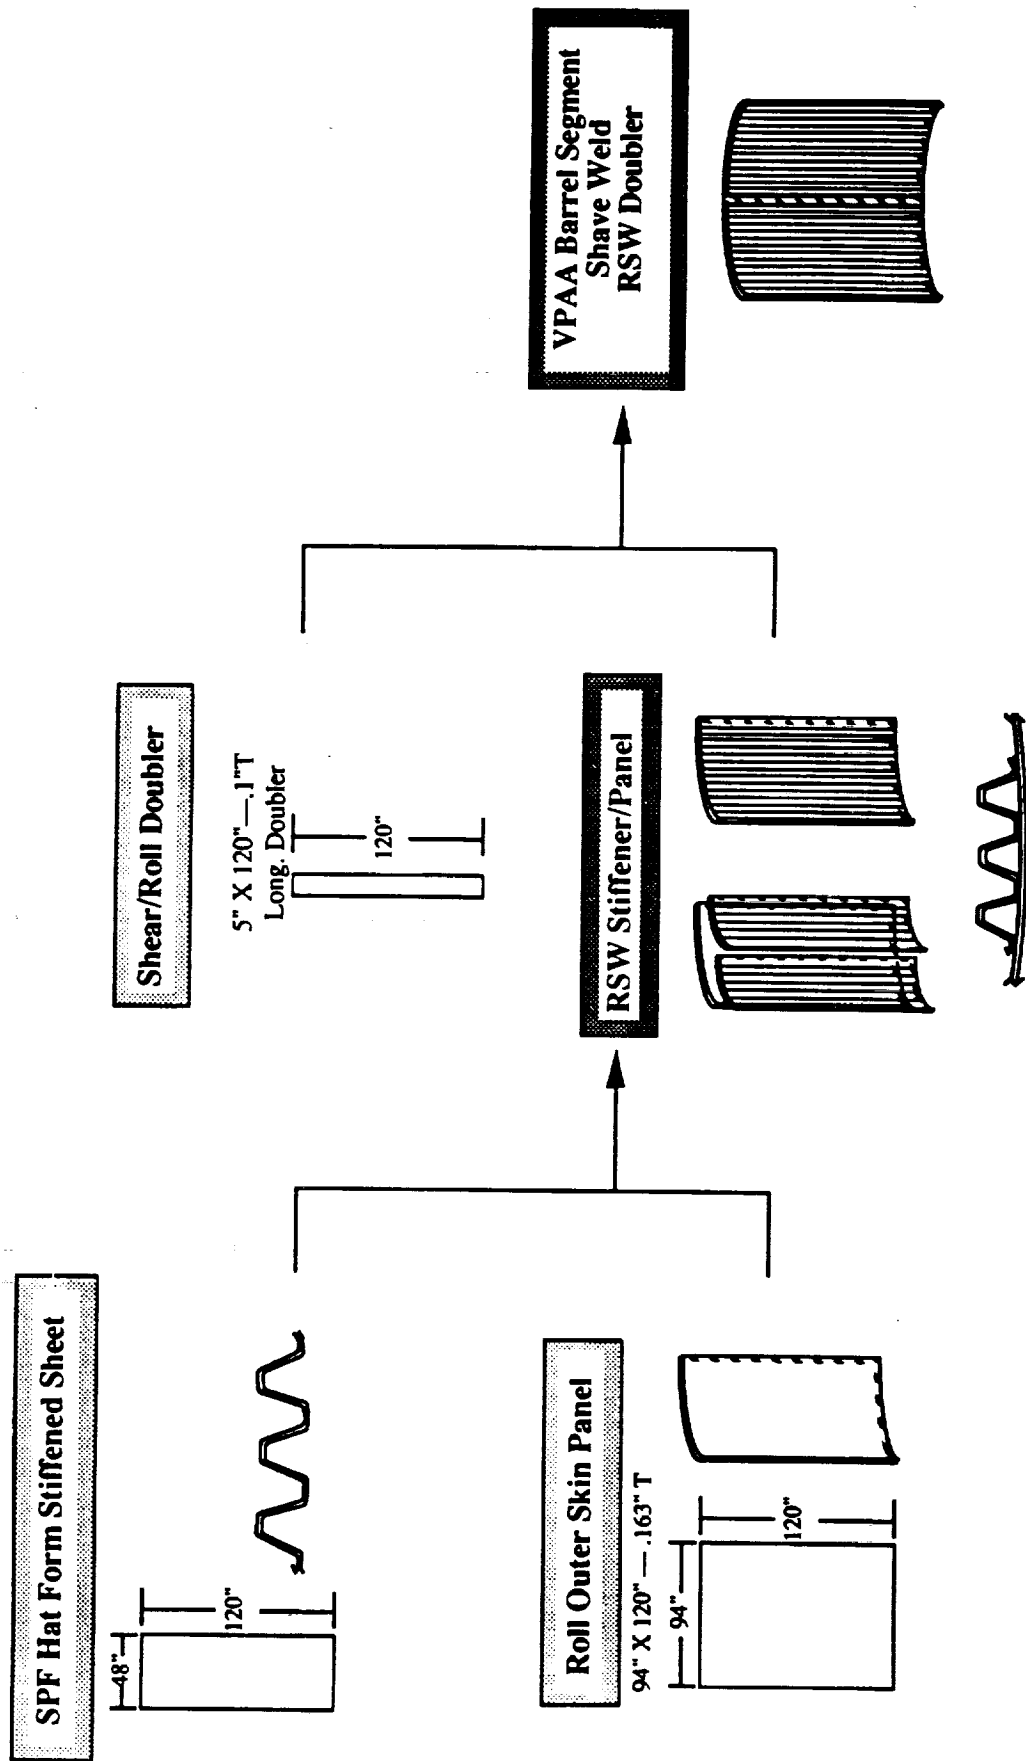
Manufacturing Process Flow for 7475 Al SPF Stiffener Panel Fabrication and Assembly Into Barrel Sections.
